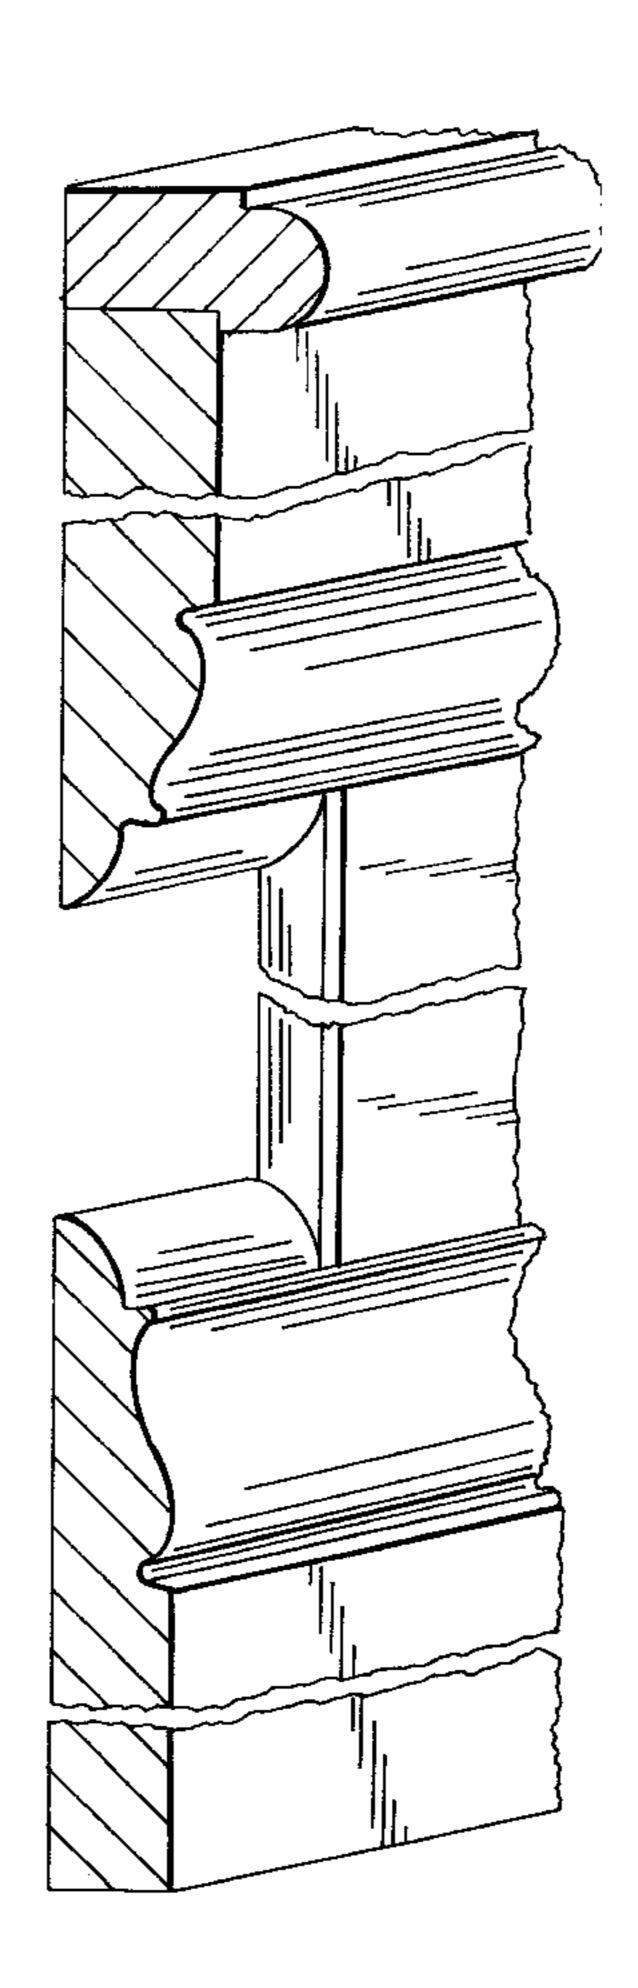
is an exploded side elevational view from the one side, to an enlarged scale, the other side being a mirror image thereof.
